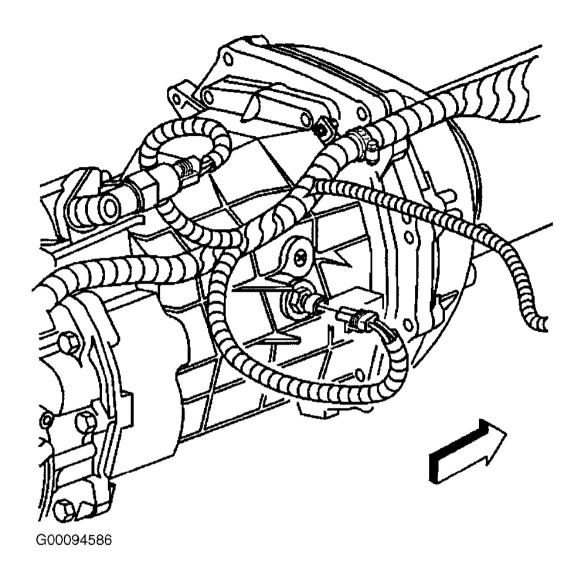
Locating Back-Up Light Switch Courtesy of GENERAL MOTORS CORP.
